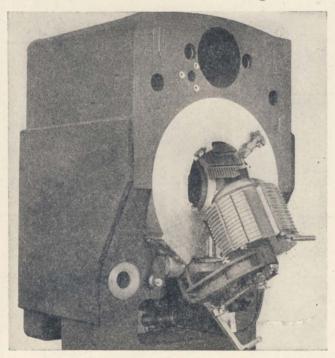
14-in. Breech Mechanism, Mk. II.
